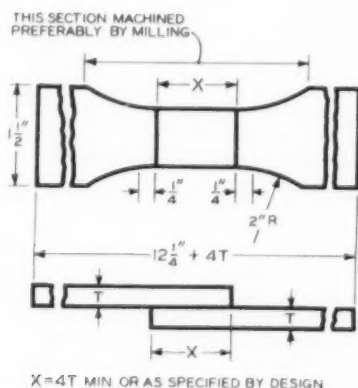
Reduced-Section Tension Test Specimen for Lap Joints
